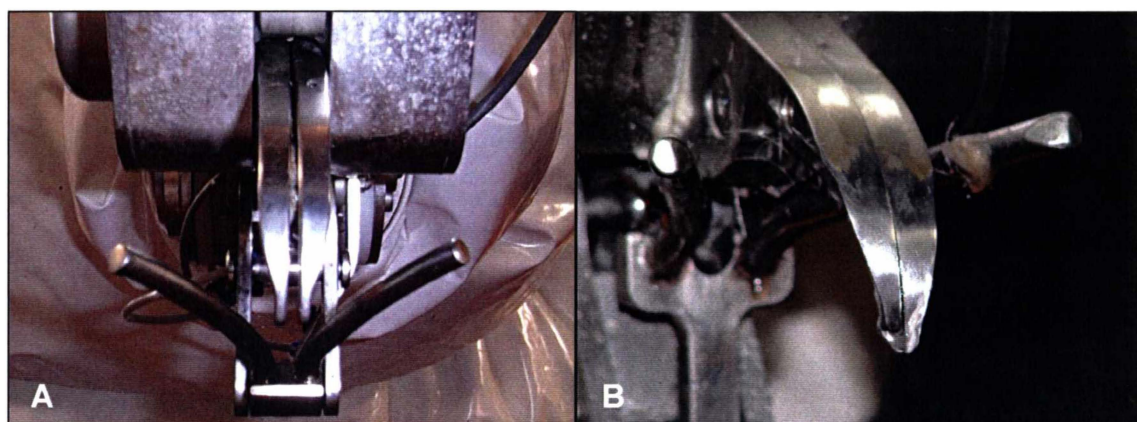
The cutting blades of a) the AMP tool and b) the Goulburn tool.
